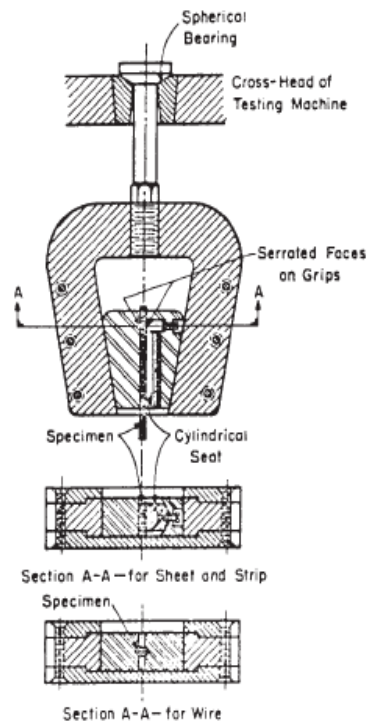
Gripping Devices for Sheet and Wire Specimens
